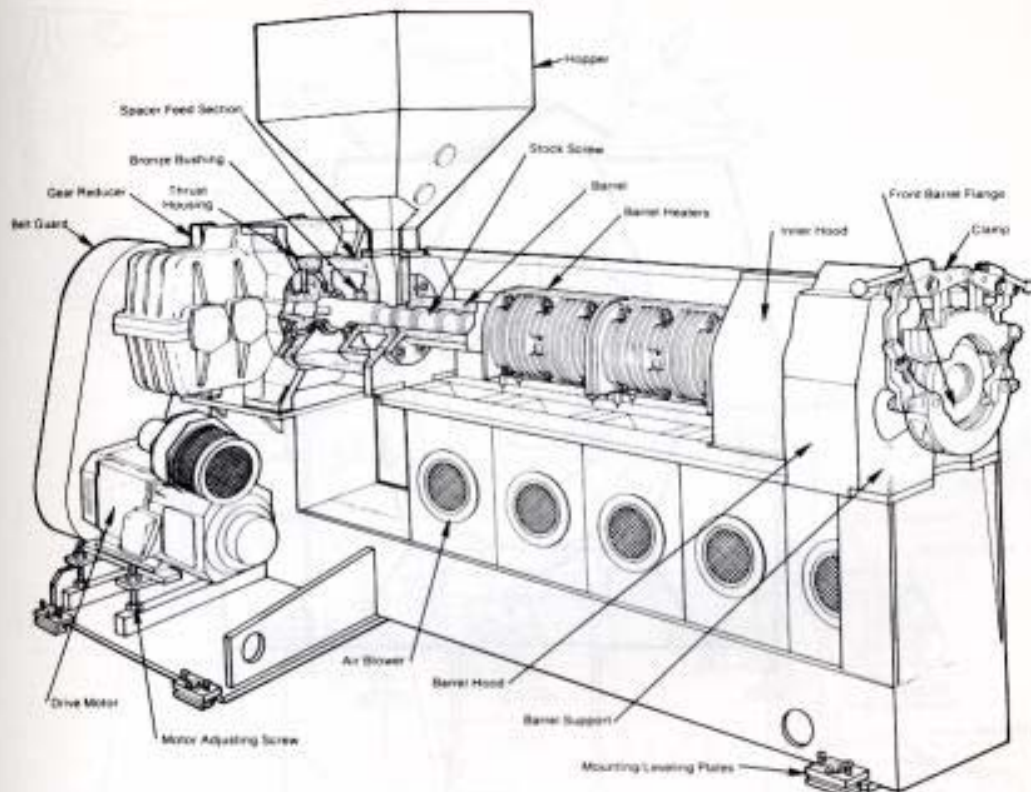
Cutaway view of extruder. (Courtesy Davis-Standard)
